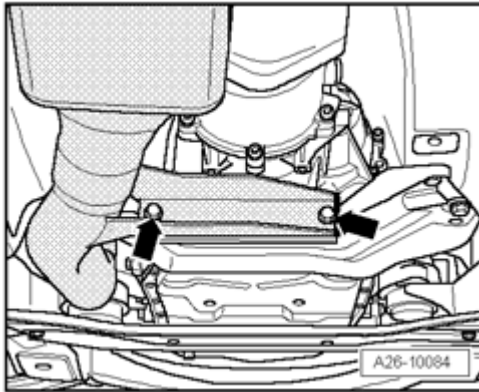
Locating Bolts At Center Bracket For Front Exhaust Pipe
